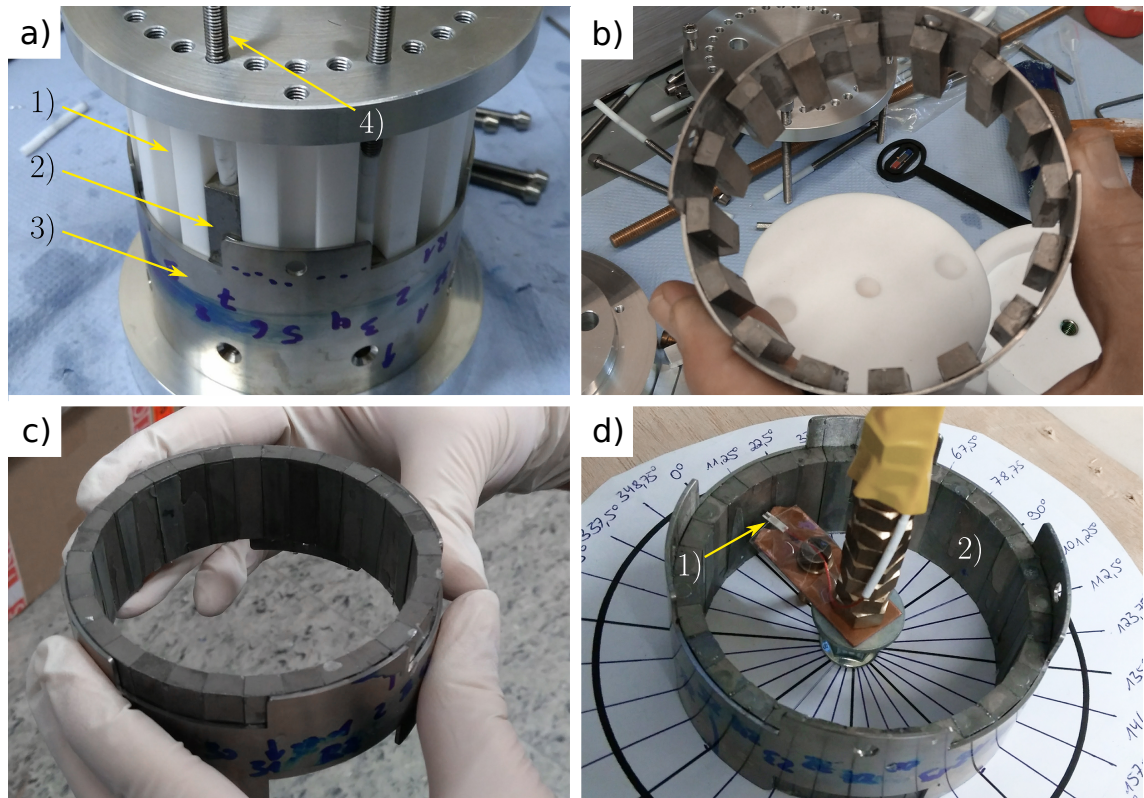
Construction and measurement setup of the octupole rings. a) Construction setup with segment holder (1), magnetic segment (2), titanium ring (3), and Ti screw with PTFE end cap (4). b) Inner titanium ring with the first 16 magnets in place fixed by glue. c) Finished octupole ring. The top and bottom surfaces were grinded afterwards to avoid slits between the rings. d) Setup for the magnetic field measurement of the octupole rings with a Hall probe on a Cu plate (rotatable) (1) and octupole ring (2). Data points were taken at $r = 39 \pm 1$ mm and $\varphi = 11.25(2.0)^\circ$.
